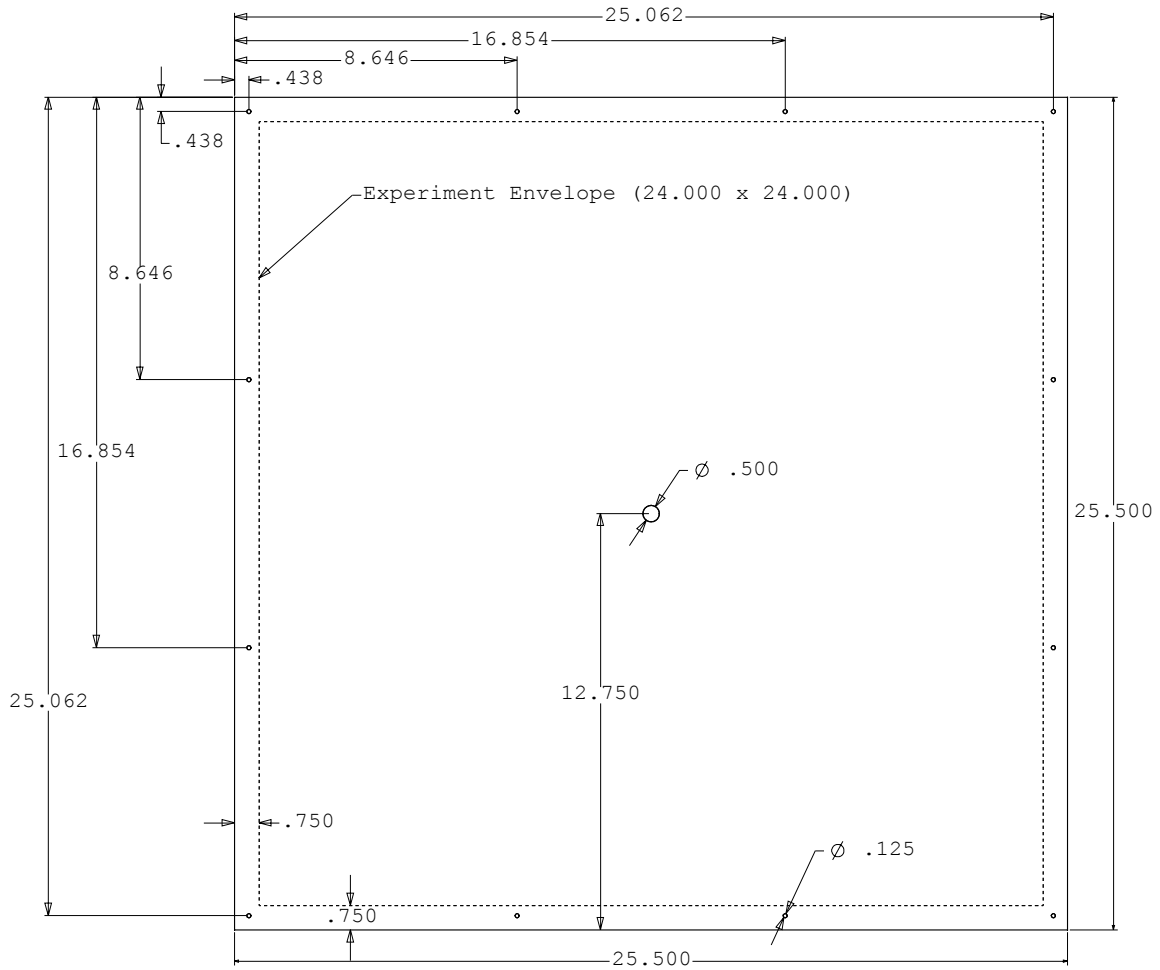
Dimensional Drawing of Carrier Plate for Footprint #4
